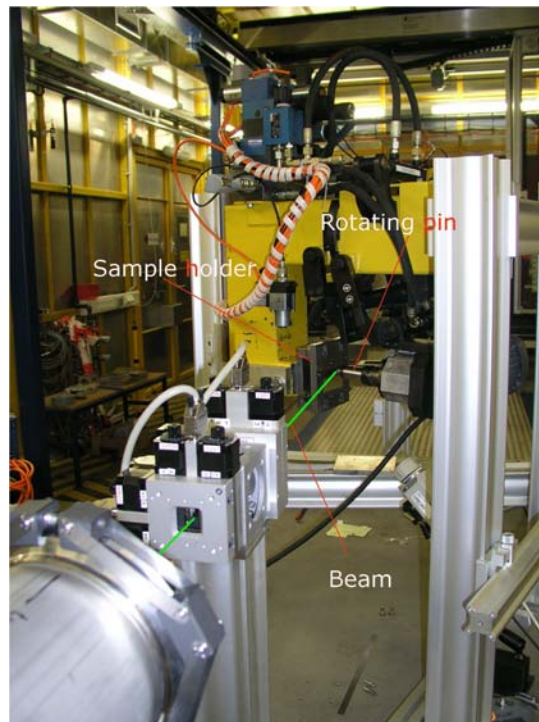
The friction stir welding test machine mounted on top of the 'user table'.
